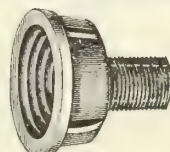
Coupling small end cut 1/4-inch pipe thread to fit our spray nozzles, large end cut to fit 3/4-inch, 1/2-inch or 3/4-inch male hose coupling.
